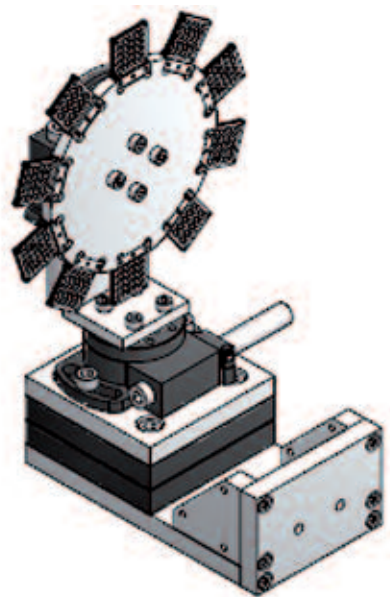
Wheel target holder populated with clamped 5×5 foil arrays.
